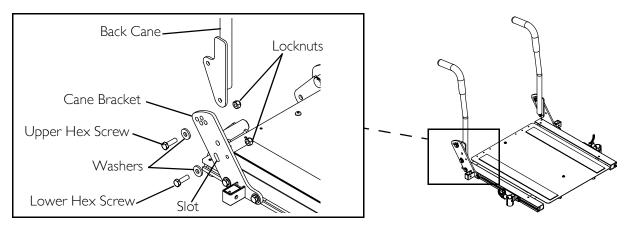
Removing/Installing the Back Canes - Adjustable ASBA Seats
